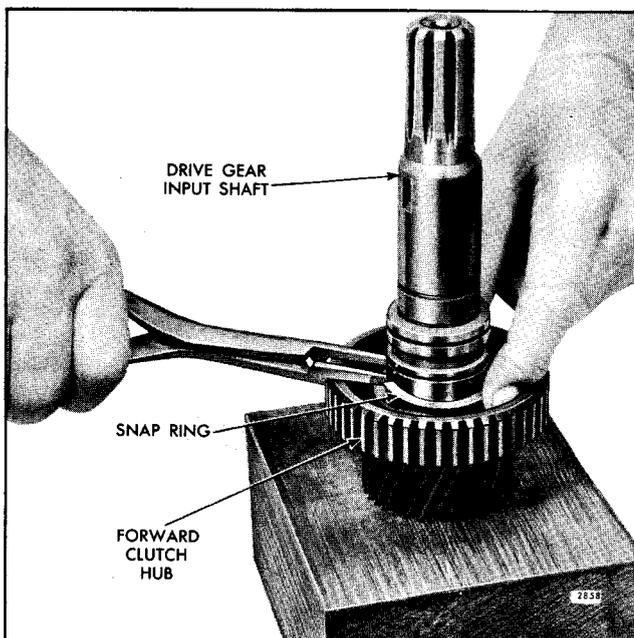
Removing or Replacing Forward Clutch Hub Snap Ring
